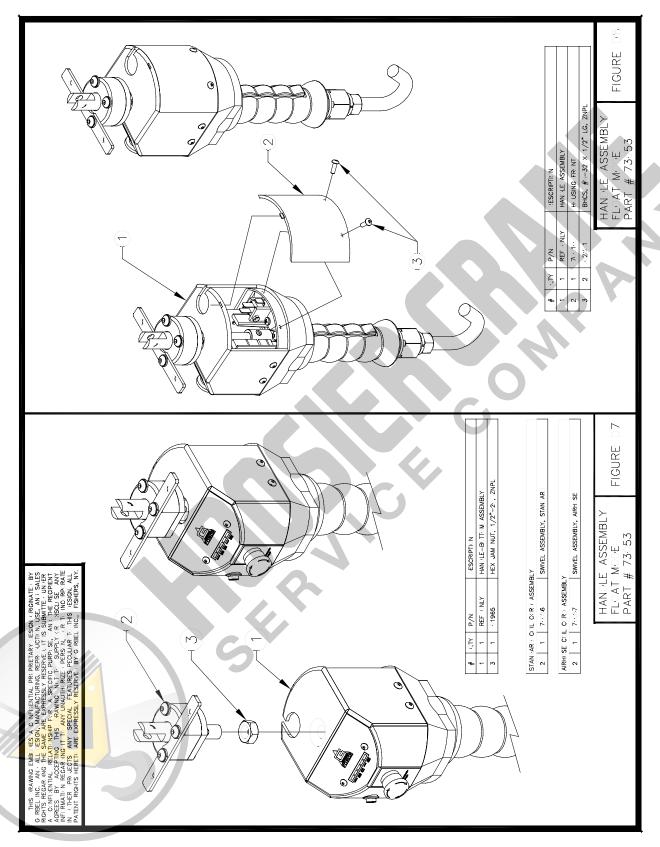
(bottom) & Figure D8 (top). Float Mode Handle Assembly.
